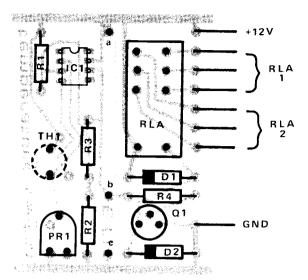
Component overlay. Note the provision of extra pads on the PCB so that TH1 and TV1 may be transposed, if required. TH1 may be mounted remotely.
